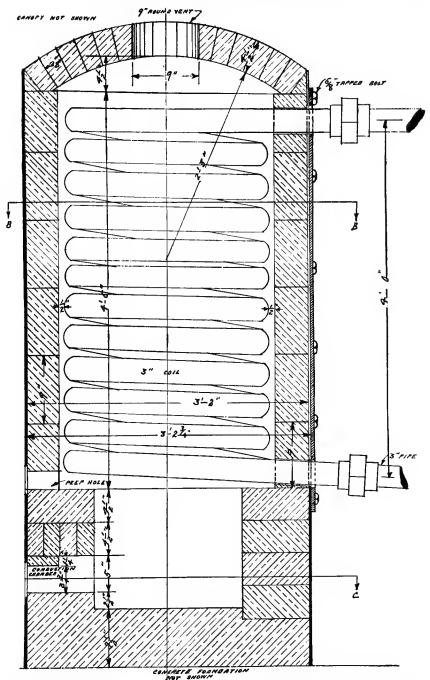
Oil heating furnace, the hot oil being used to heat jacketed stills containing very inflammable chemicals.
